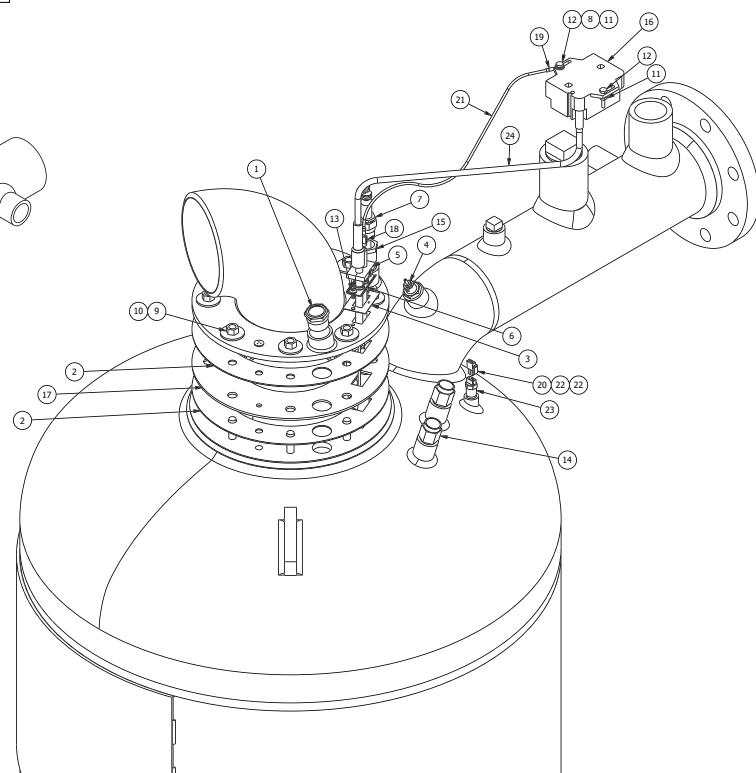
EDR-1500-2000 BURNER REGION ASSEMBLY
